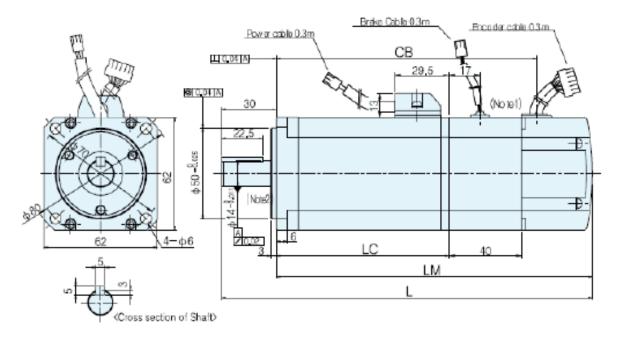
Technical drawing of servo motors and their exterior dimensions
